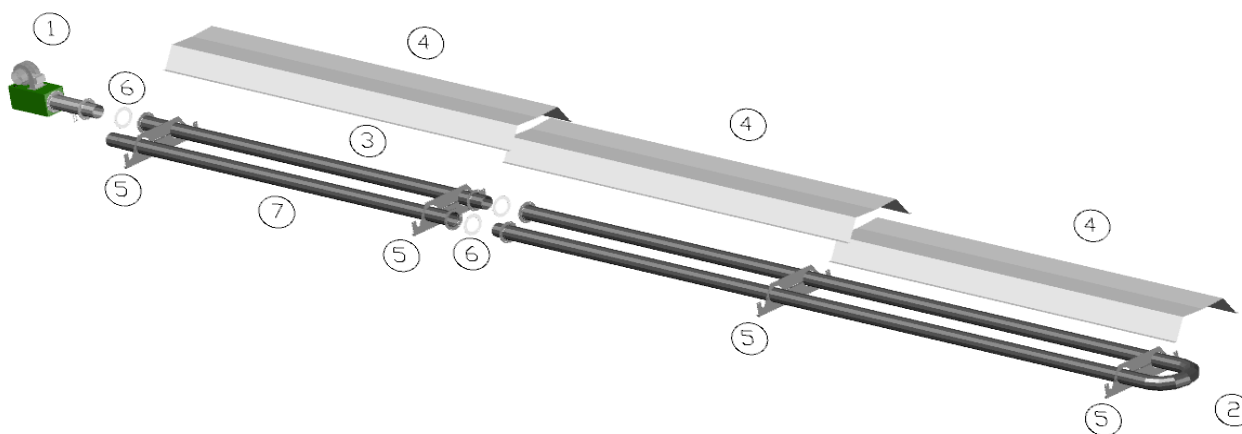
SUN-BEAM tubes set, "U"/"I" type
